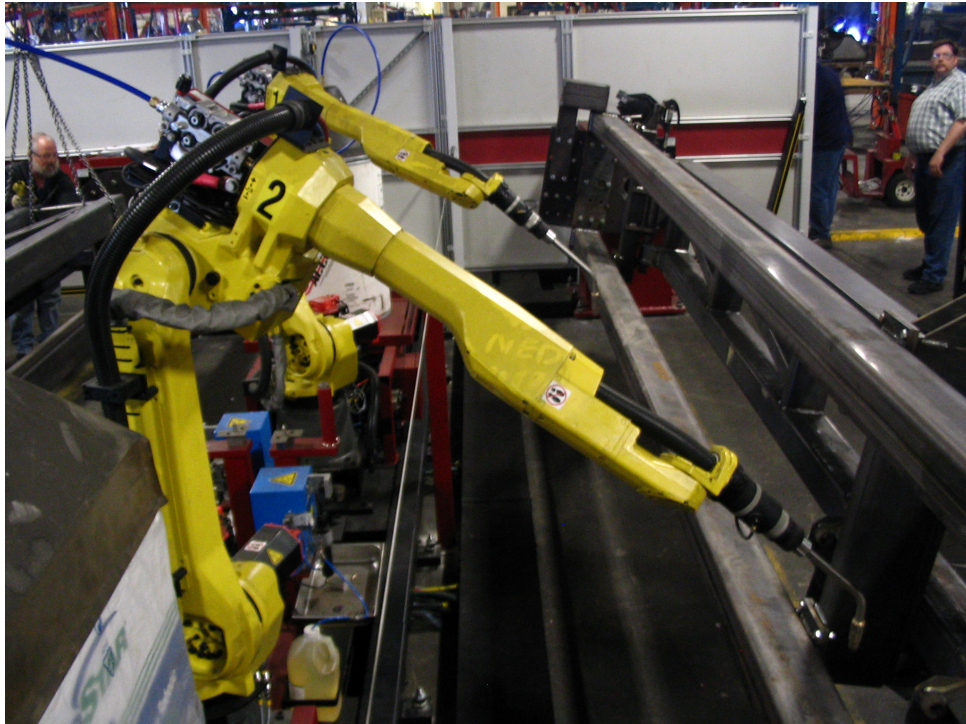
A set of 6-axis robots being used for welding operations.[15]
